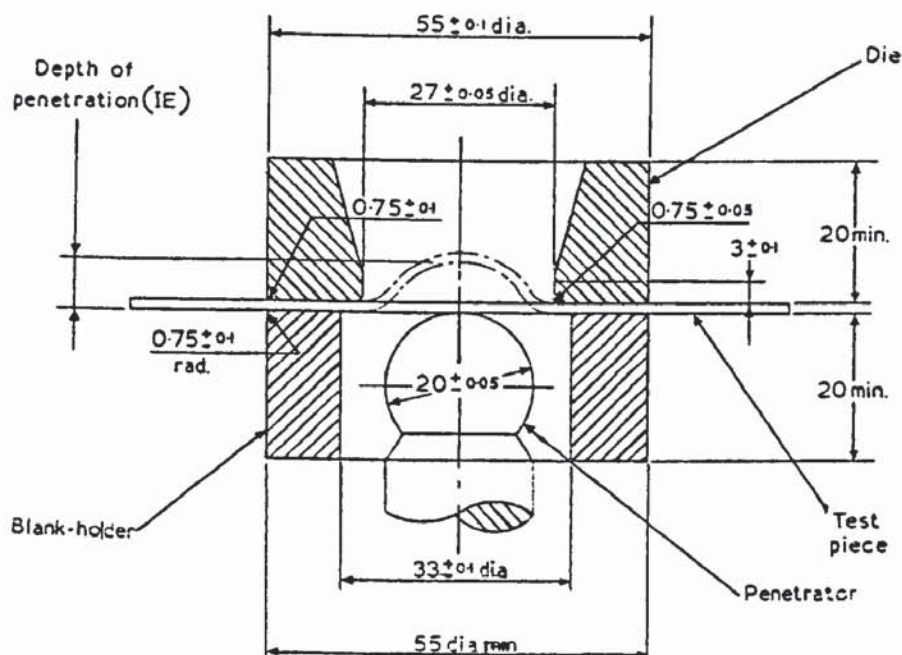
Dimensions (in millimeters) of punch test penetrator, die and blankholder.
